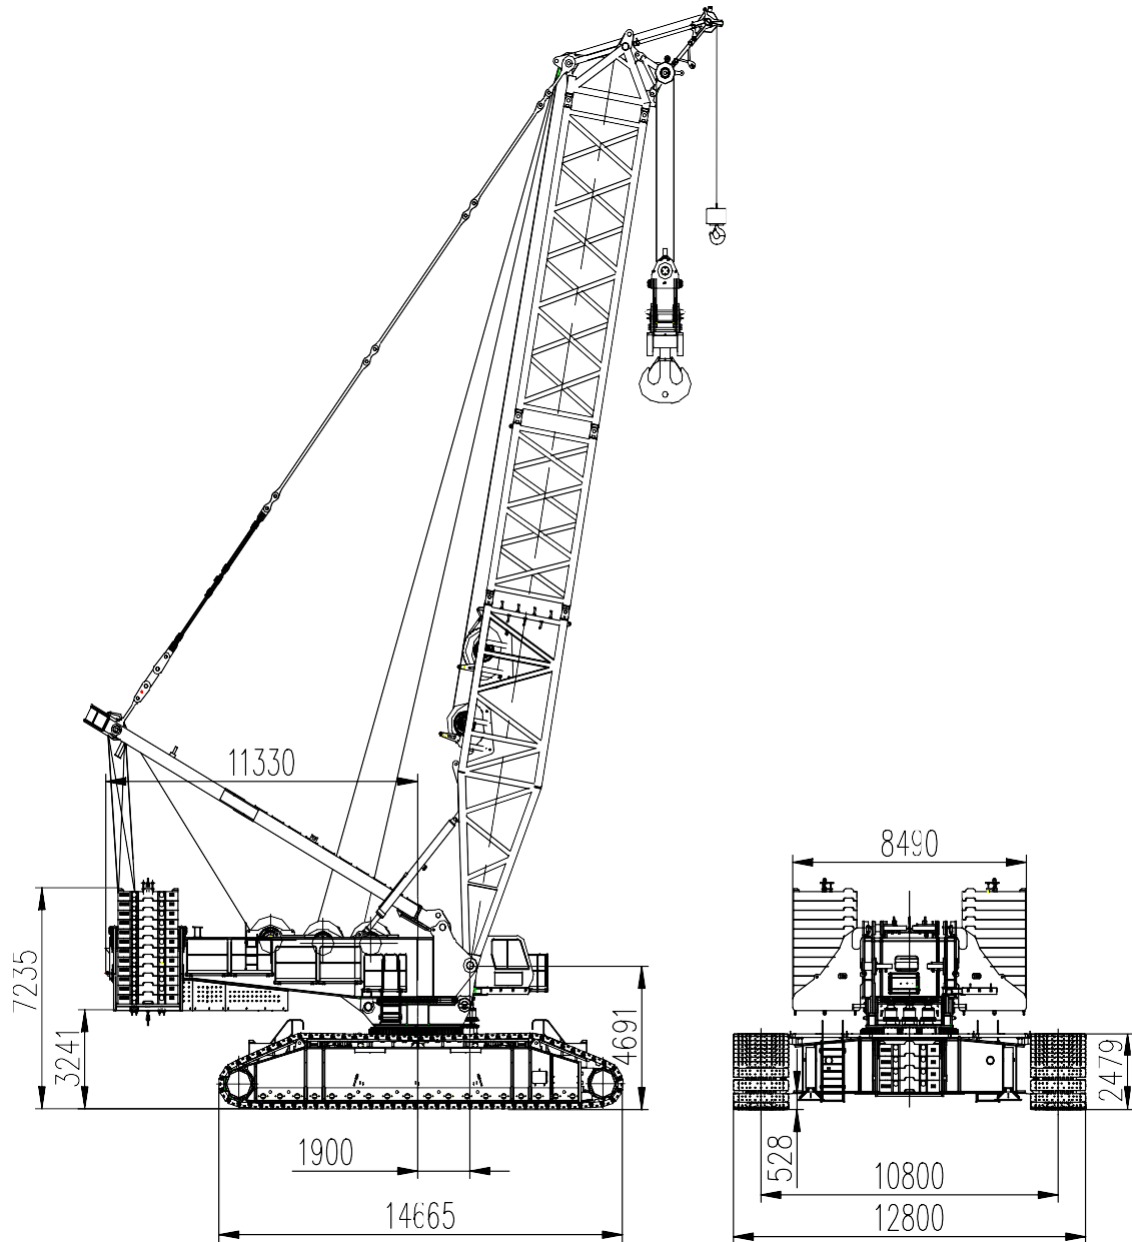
XGC16000 Crawler Crane Outline Dimensions in Standard Working Condition
